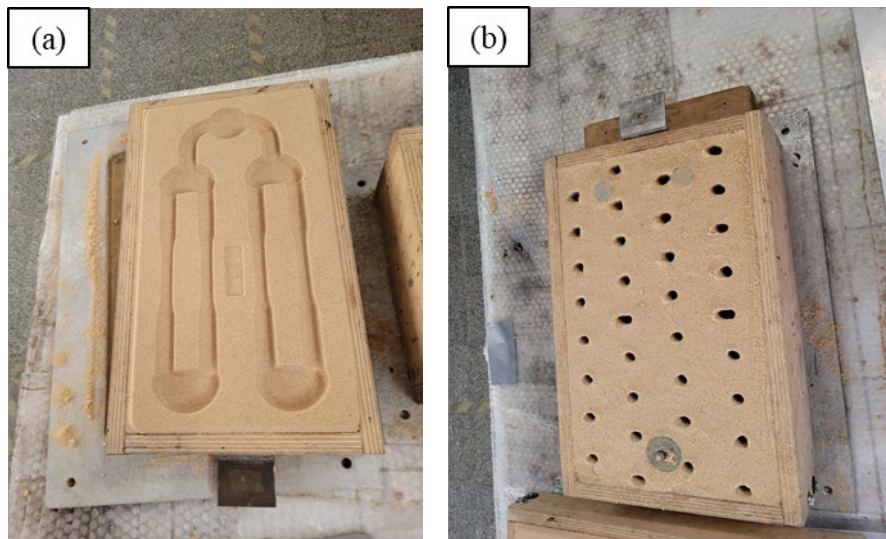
A sand mould is used for specimen production. (a) cope (b) mould after hardening using CO₂.
